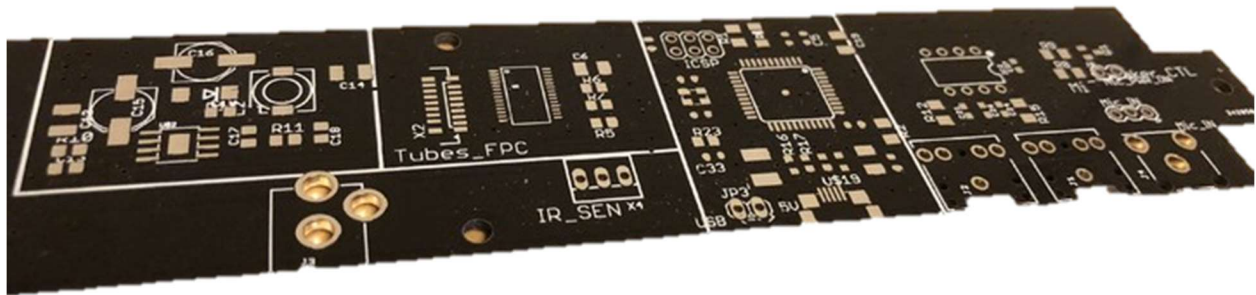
MK1 Audio Spectrum Visualizer PCB
